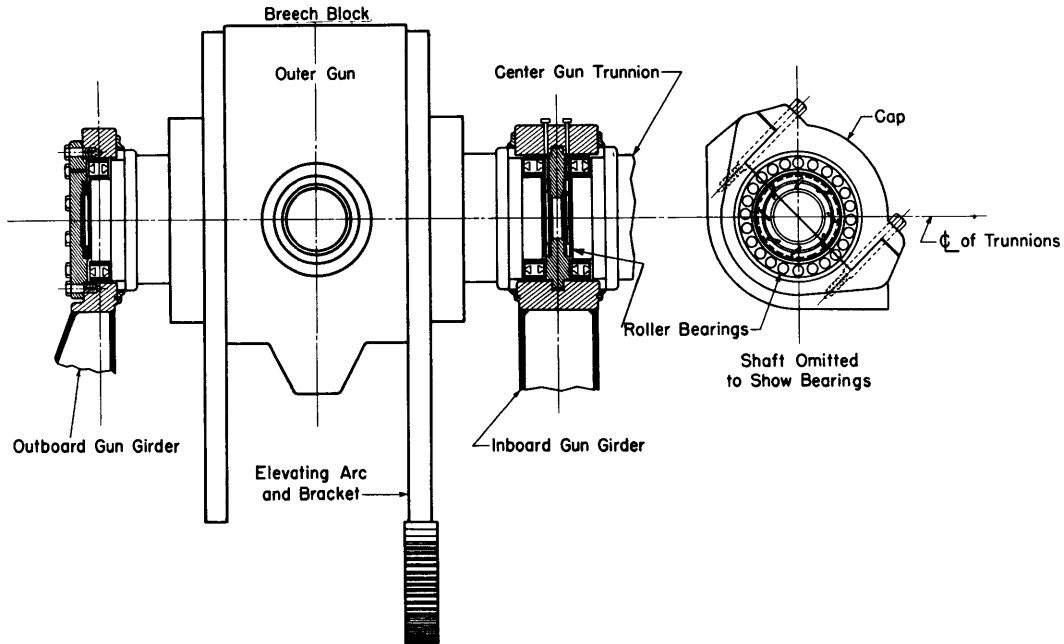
Diagram Showing Details of Trunnion Bearing Blocks and Bearings
